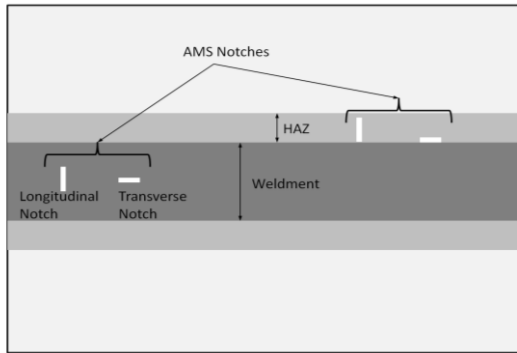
Typical Ultrasonic Welded Reference Plate
